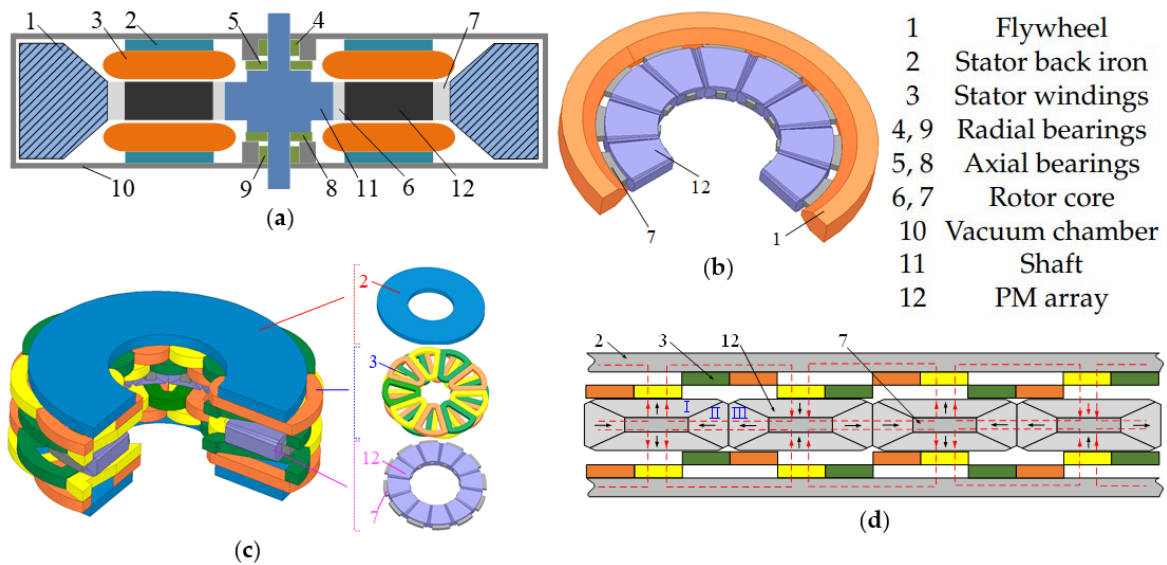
proposed AFDSTPMM. (a) 2D cross-section of the machine. (b) 3D cross-section of rotor. (c) 3D cross-section of the machine. (d) 2D equivalent electromagnetic structure of the machine [56]
